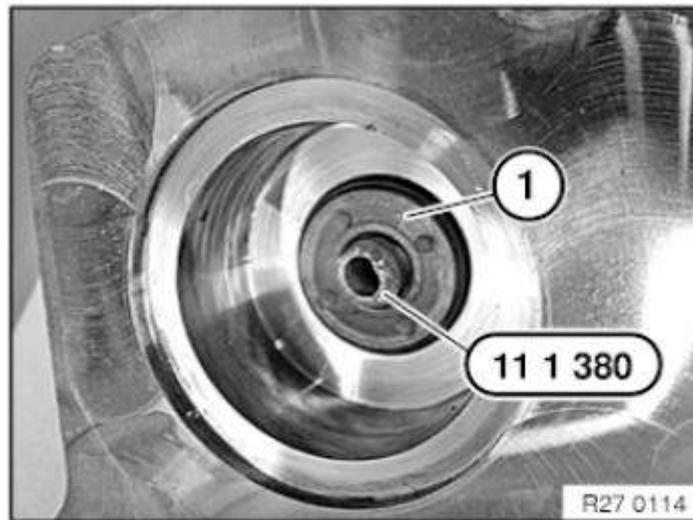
Sliding Radial Shaft Seal Over Assembly Sleeve Onto Actuator Shaft
